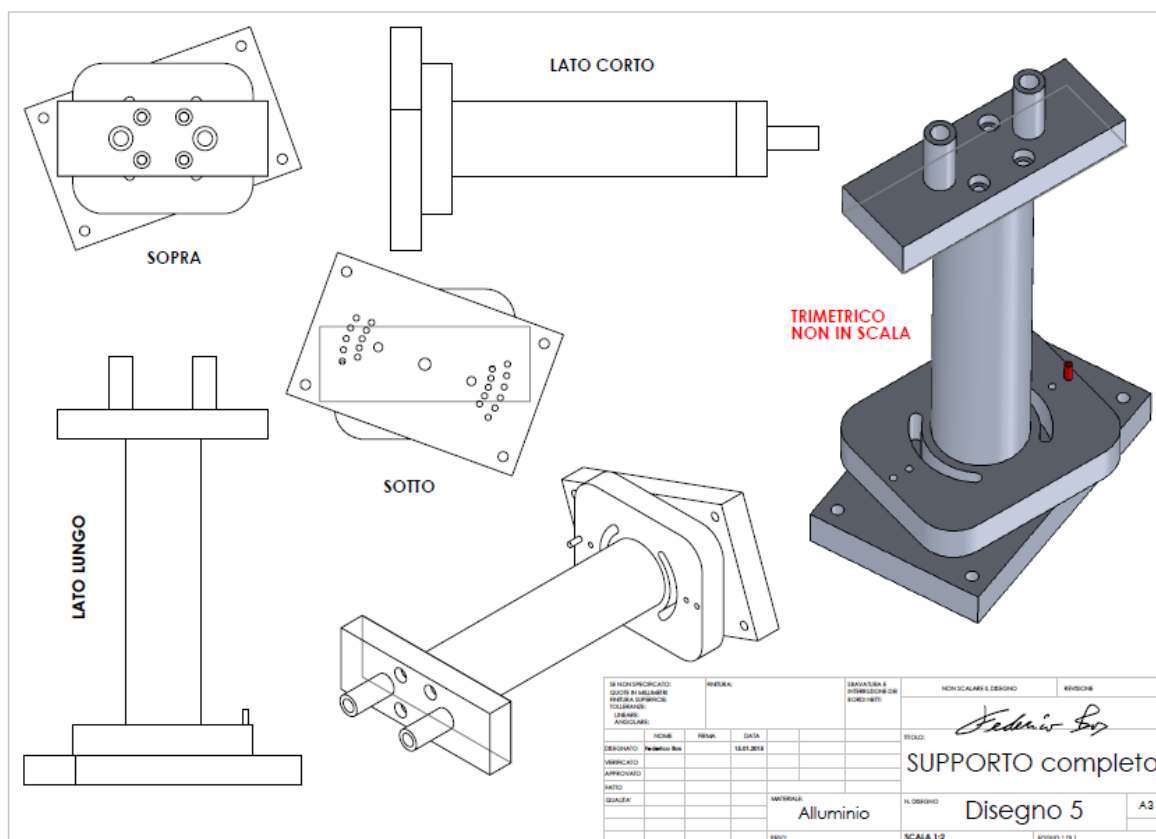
Isometric views and trimetric 3D rendering of the assembled support
